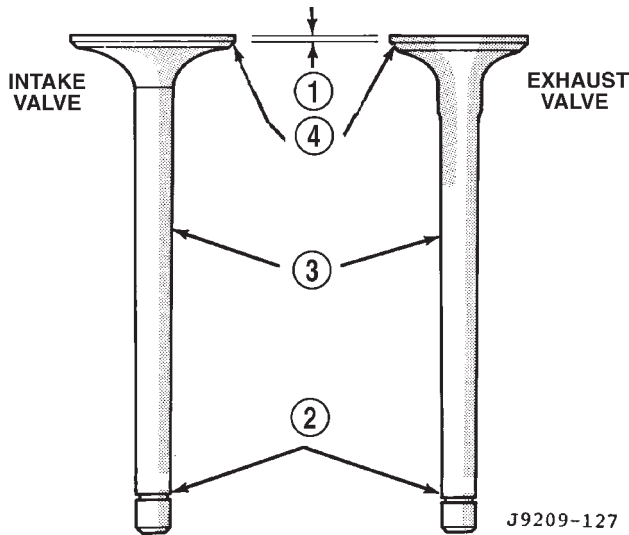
Intake and Exhaust Valves—8.0L Engine
